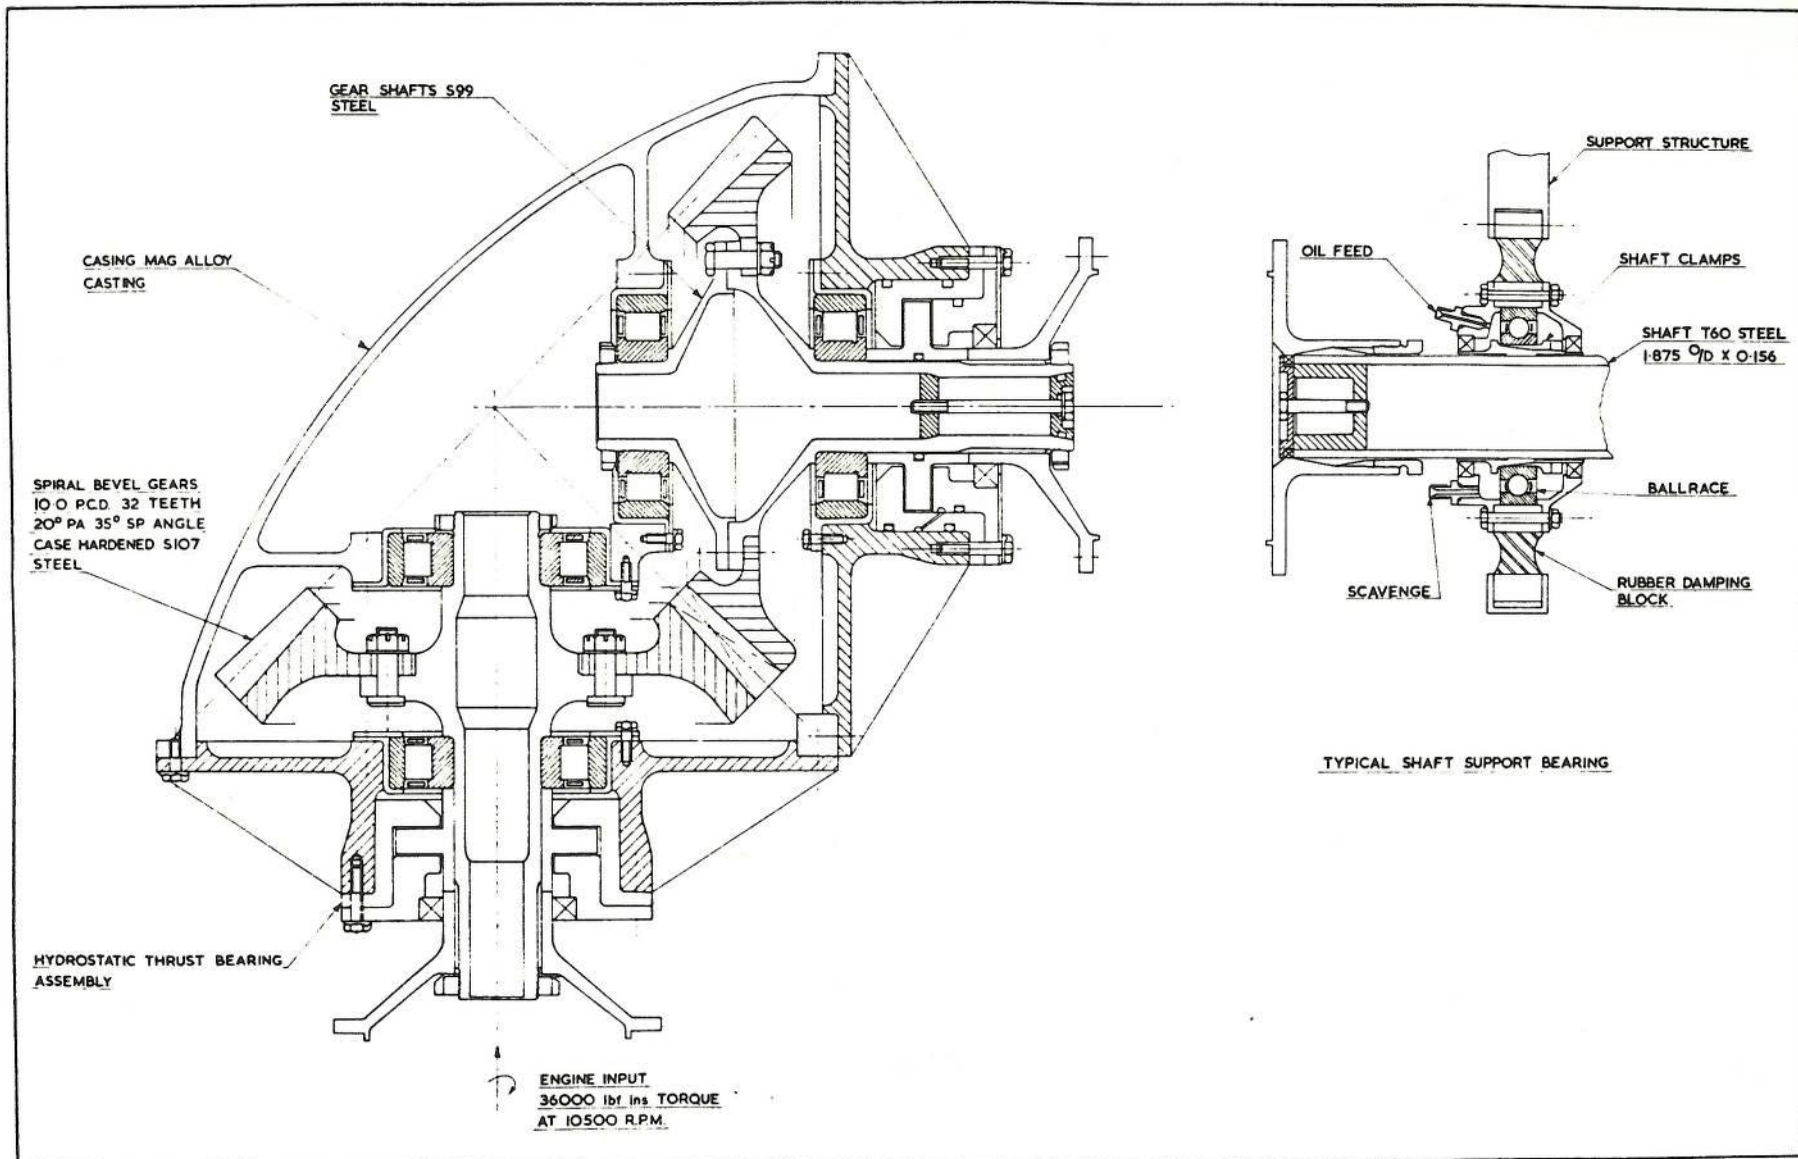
ENGINE CROSS-COUPLING TRANSFER GEARBOX
